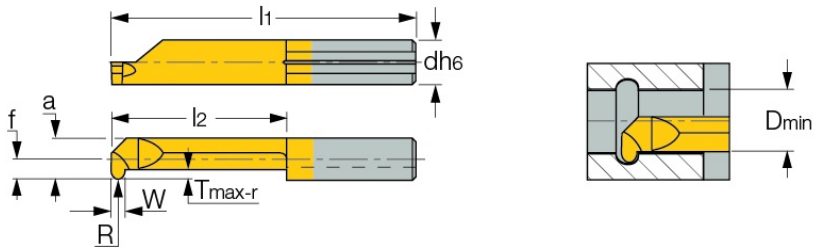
Iscar PICCOCUT tool dimensions (ISCAR LTD., 2016)
